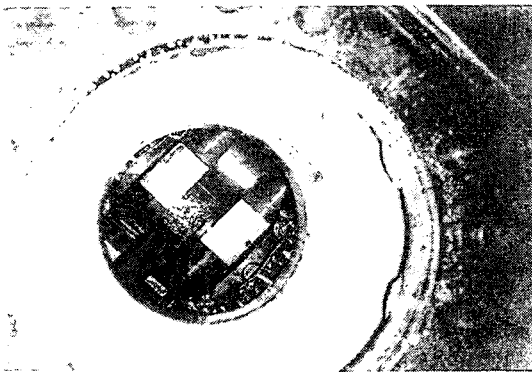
Erosion · crevice corrosion in contact face of engine block O-ring
